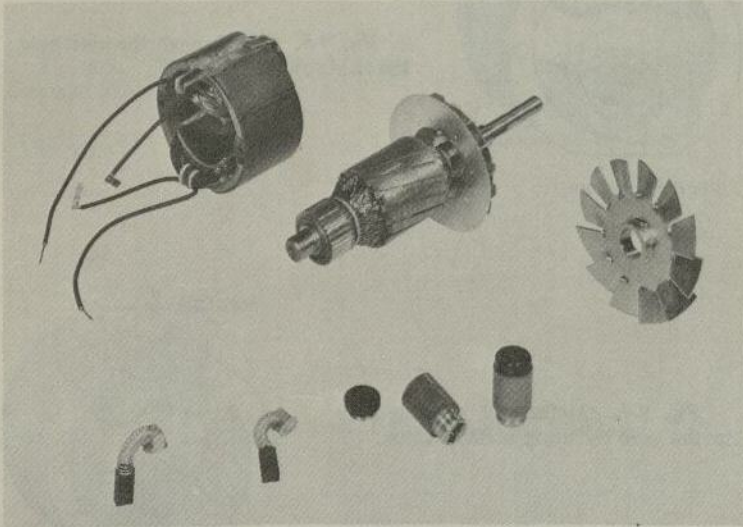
Parts of a universal motor. (*The Dumore Company*)
